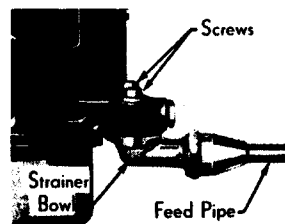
The strainer in the carburetor may be removed with the bowl by disconnecting the feed pipe and removing the two screws shown.
